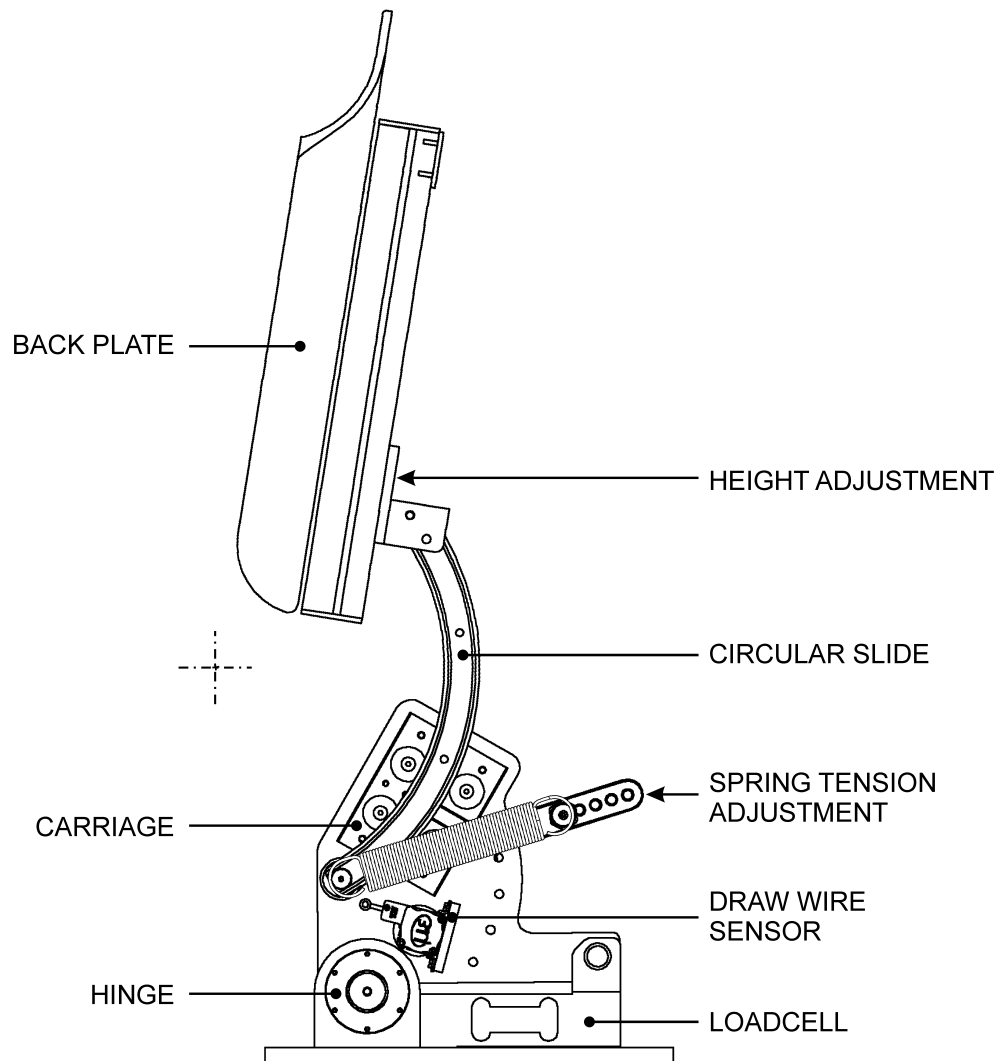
A drawing of the backrest assembly; showing the back support mount, the circular slide segment and the back plate. This drawing does not show the lateral supports or the head support. The centre of rotation of the virtual hinge is indicated by the centre mark.
